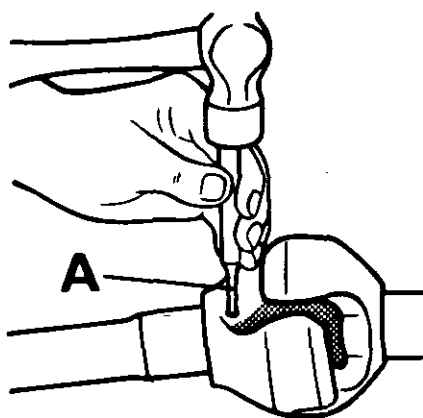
ASSEMBLING UNIVERSAL JOINT
